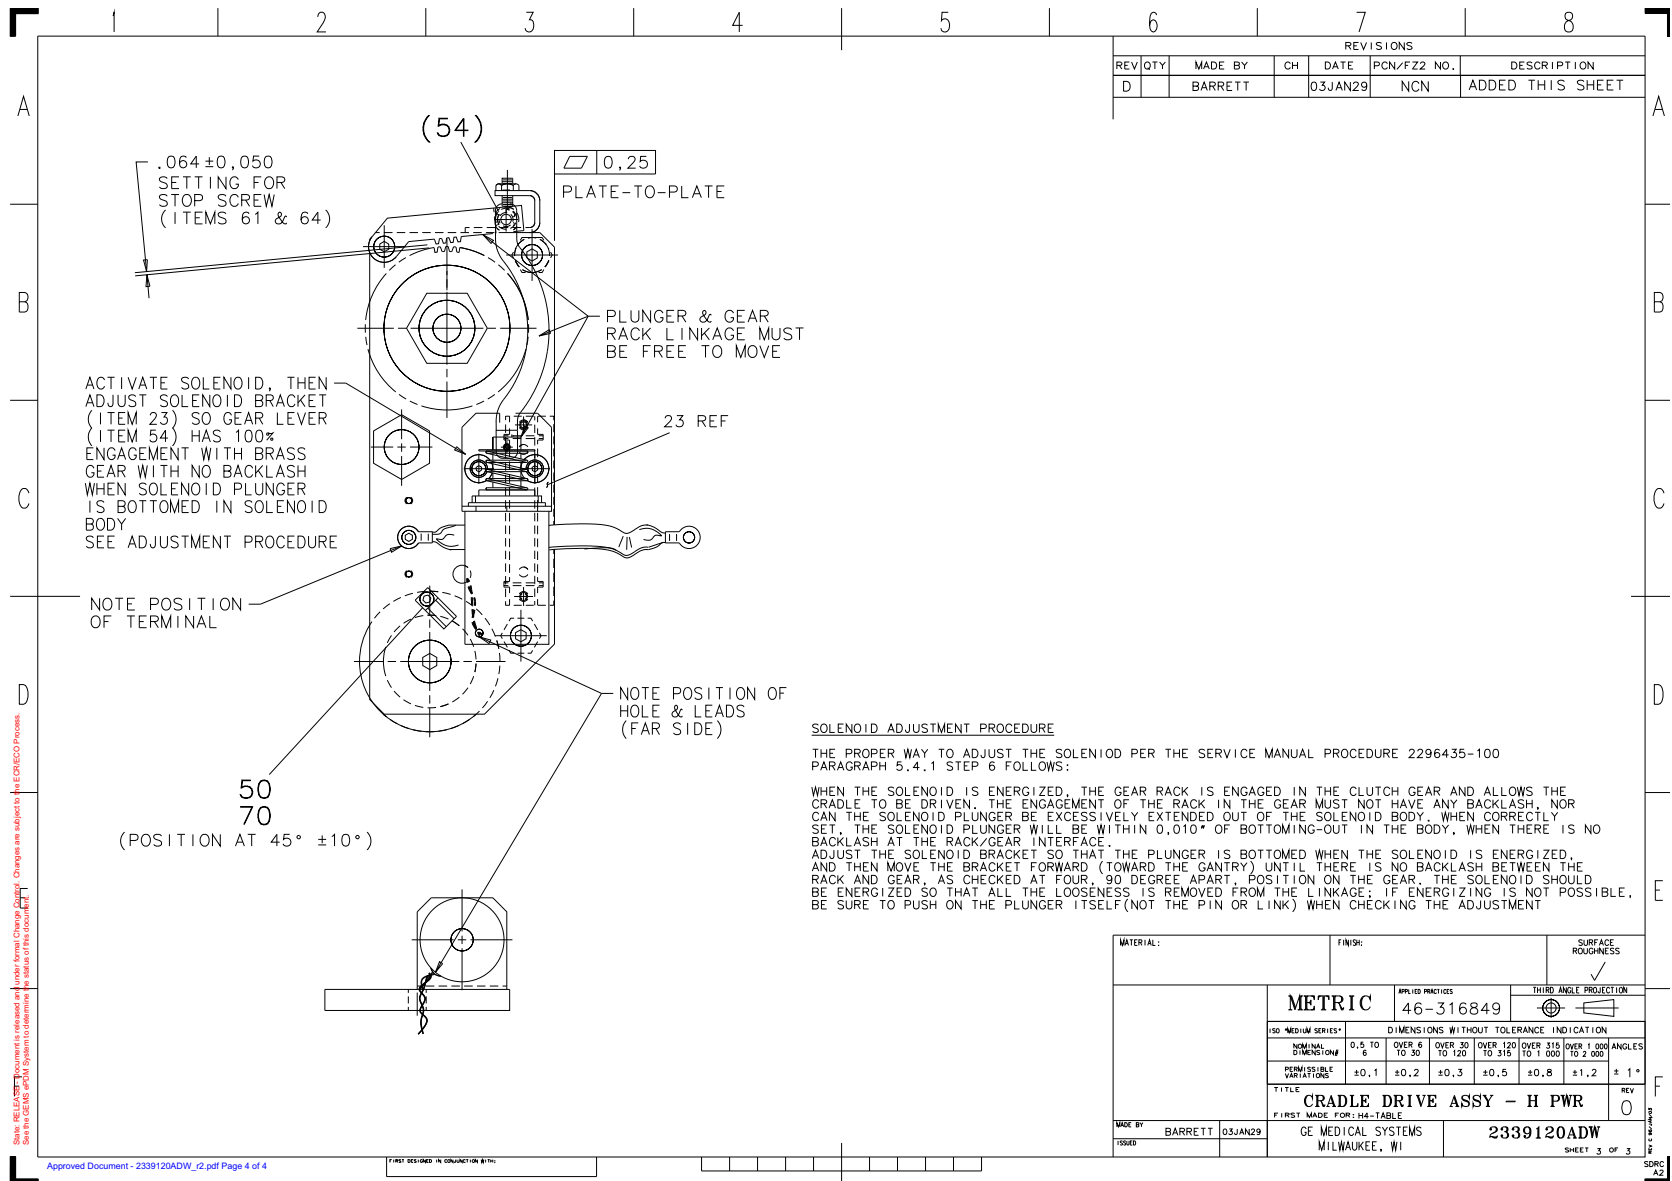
Cradle Drive Assembly (2339120, sheet 3, rev 0)
